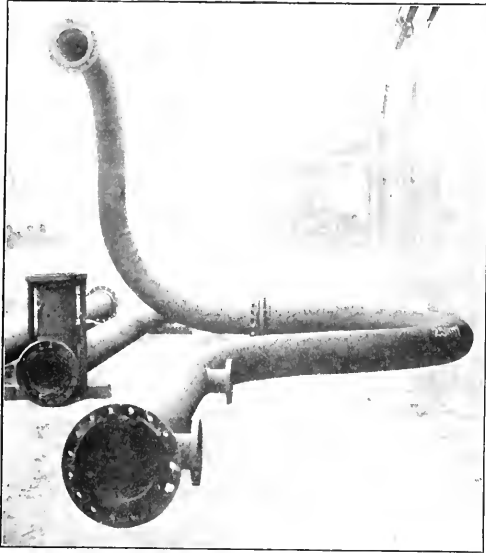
EXAMPLE OF WELDING POSSIBILITIES
